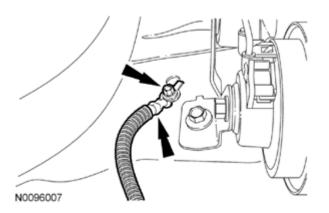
Locating EPAS System Wiring Harness And Bolt Courtesy of FORD MOTOR CO.
